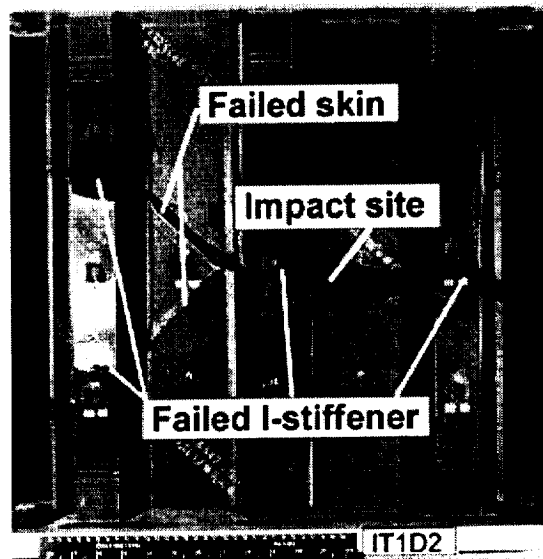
Failure location on stiffener side of Specimen IT1D2.
